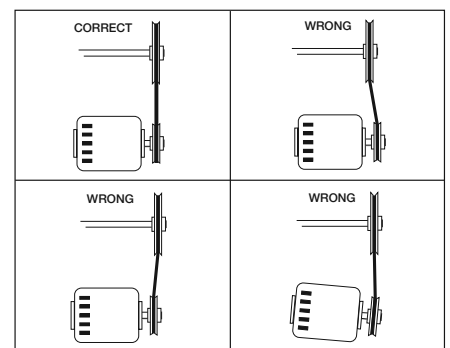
Side By Side Installation MOTOR AND PULLEY MOUNTING
